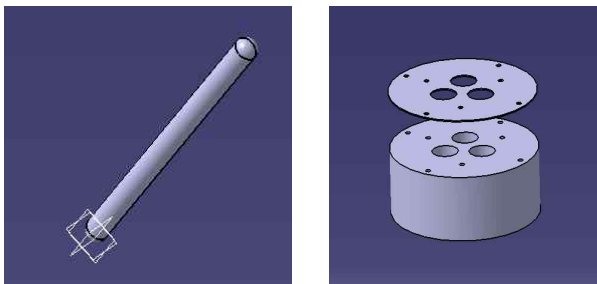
Configuration of disk, pin specimen and jig (left : pin specimen; right : disk specimen and jig)
